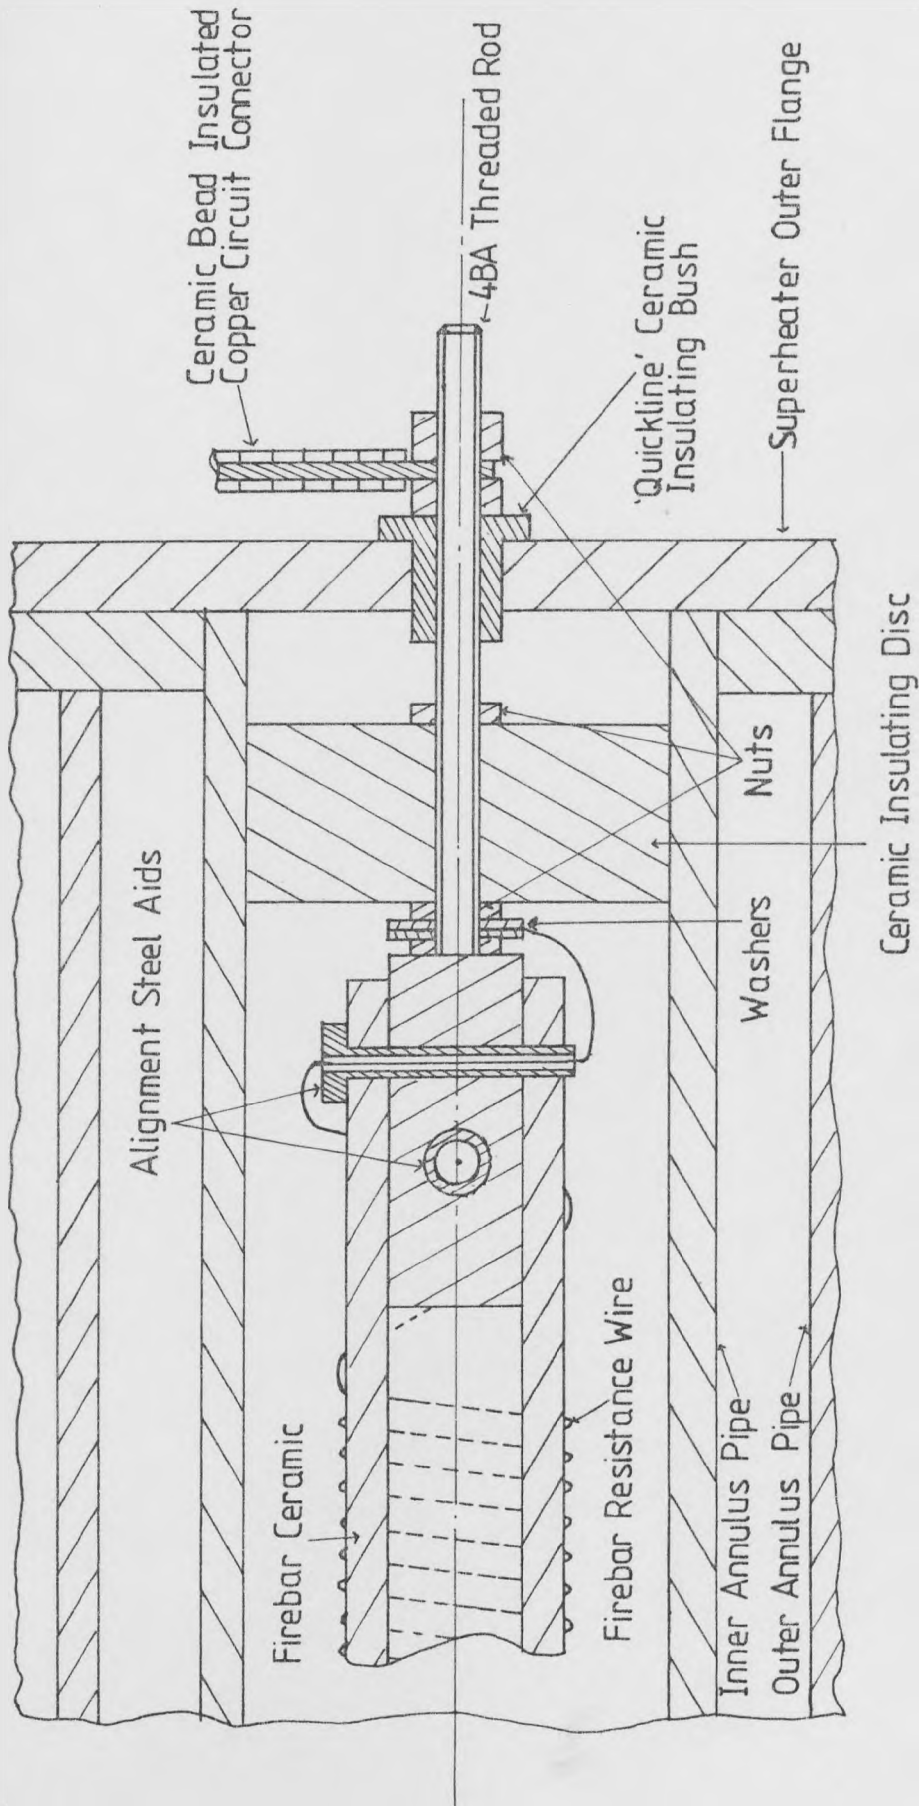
Radiation Superheater Firebar Support Assembly
